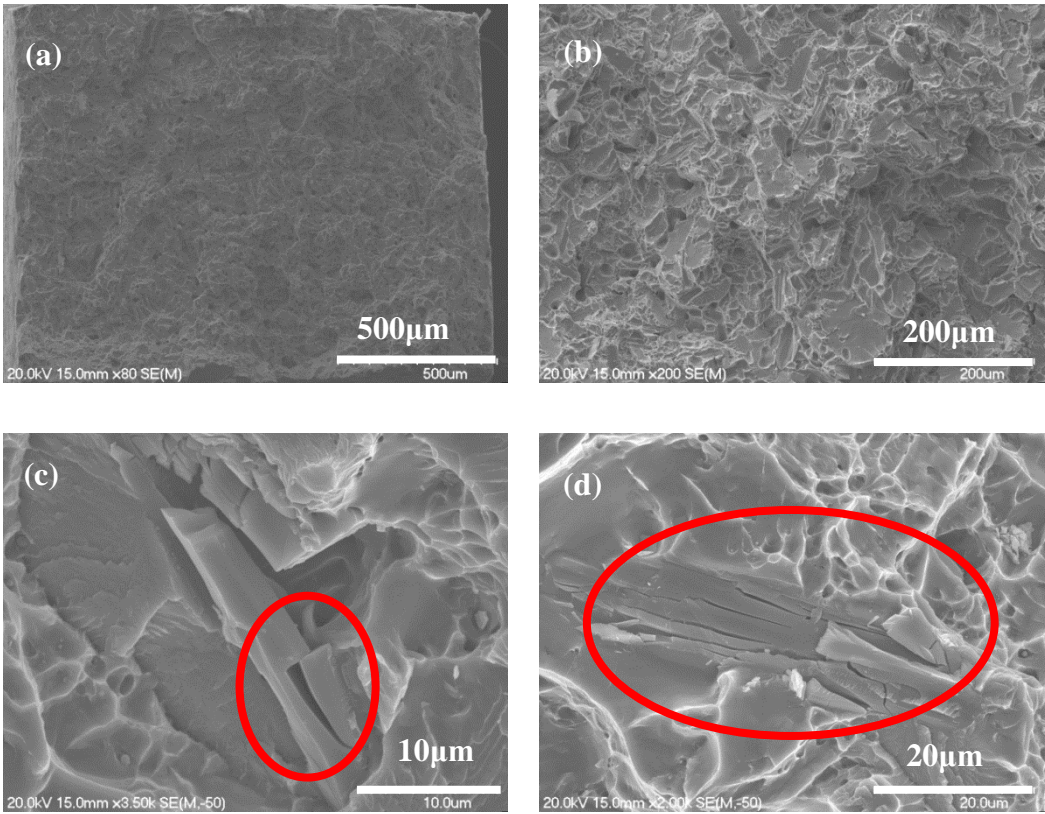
Fracture surface of a sintered Ti-0.6LaB₆ sample
